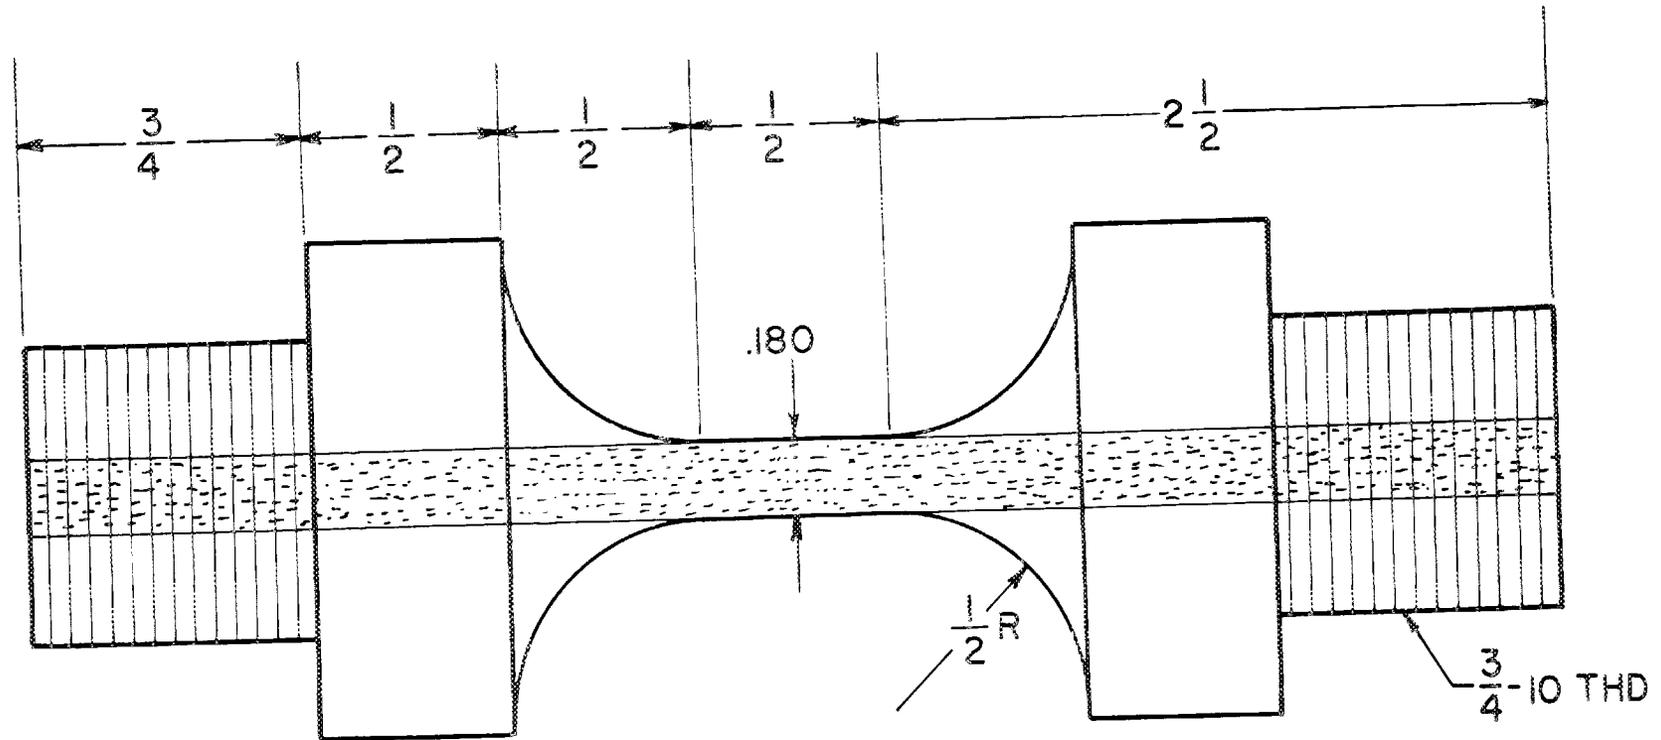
Type 347 Stainless Steel-UO₂ Fatigue Specimen.
